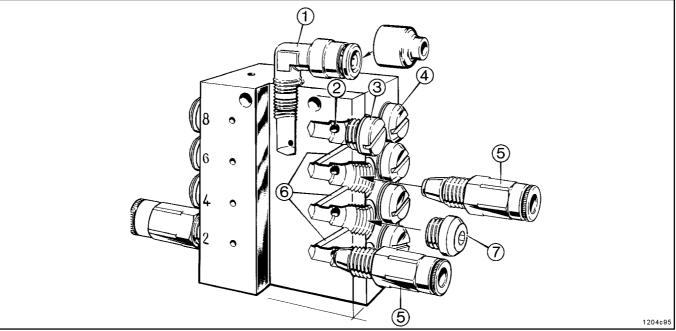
Install the push-in type outlets fittings and closure plugs in accordance with the dosage
